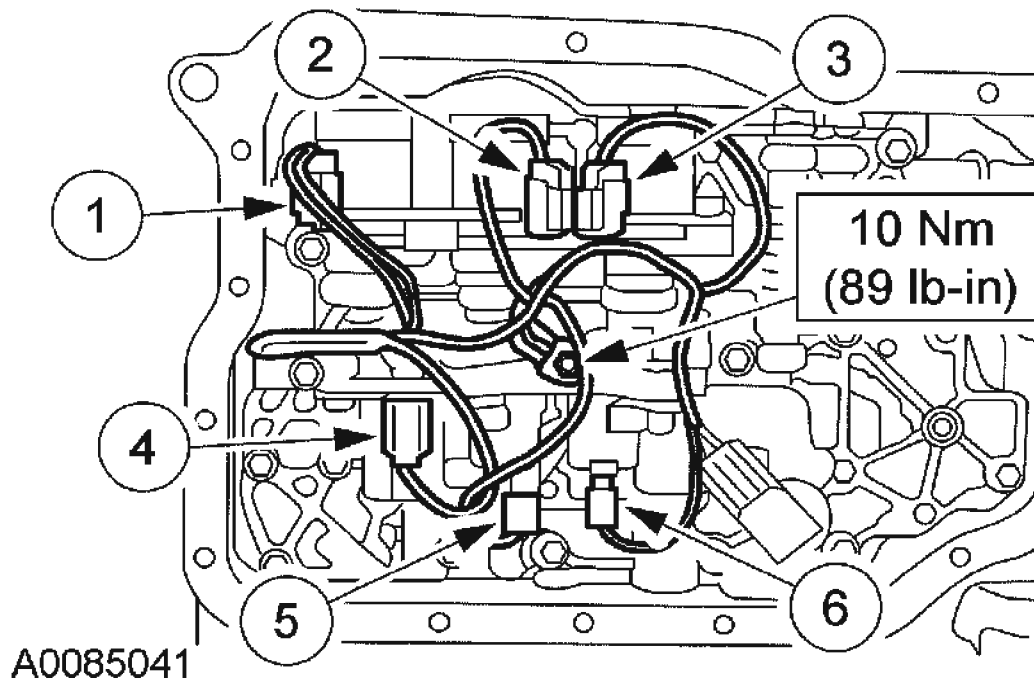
Installing Main Control Wiring Harness, Connecting Electrical Connectors And Installing Ground Wire Bolt
